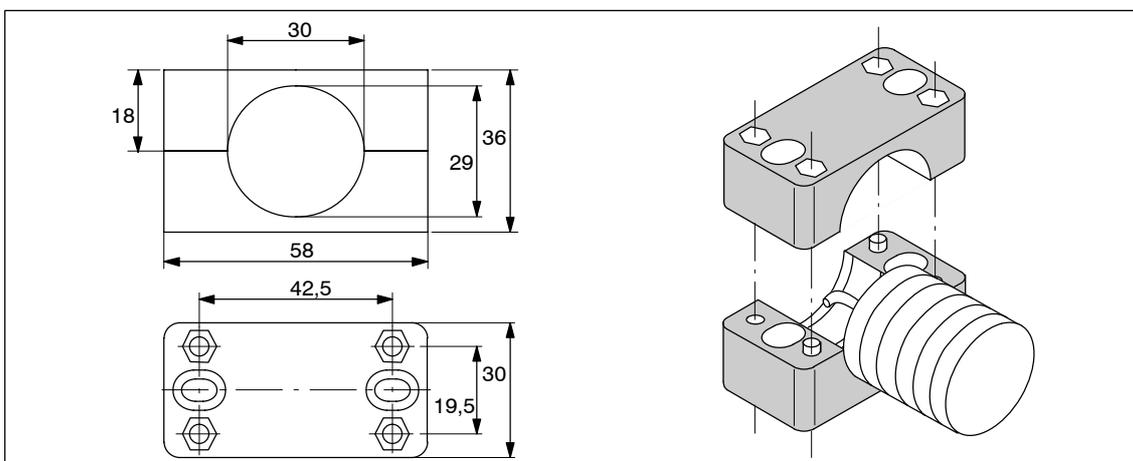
Mounting diagram and dimensions of SLG 40 with mounting clamp
